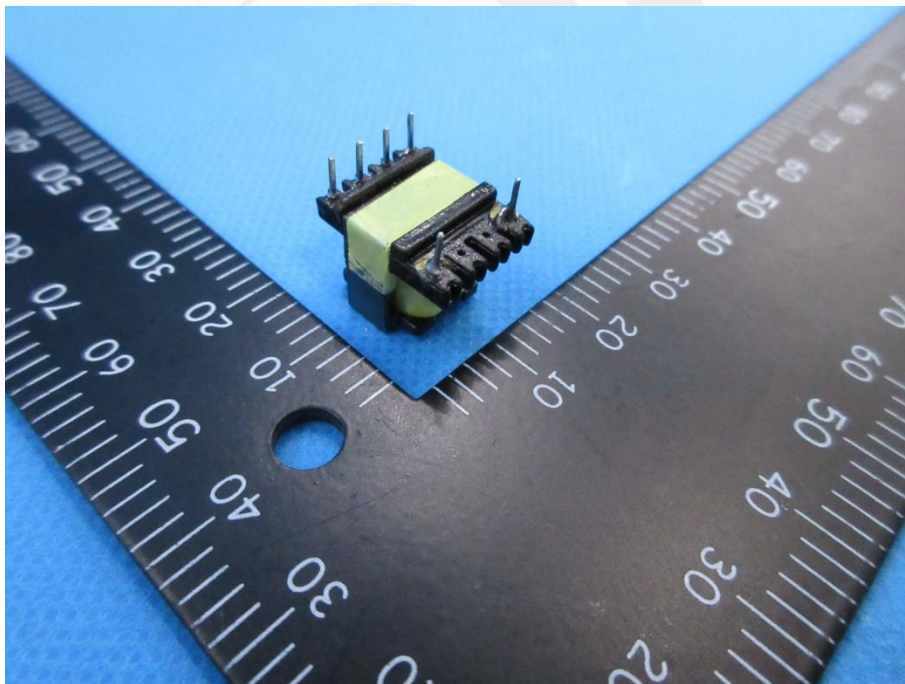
Transformer view ( the core near secondary pin must be wrapped two layers insulation tape)
